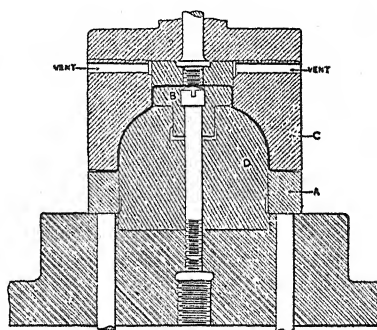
Final Forming Die to Produce the Part Shown at E.
